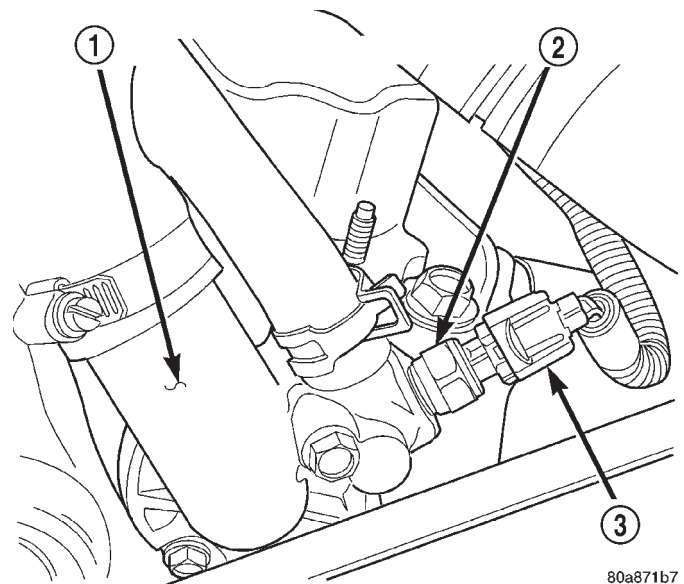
Engine Coolant Temperature Sensor - Typical 80a871b7
